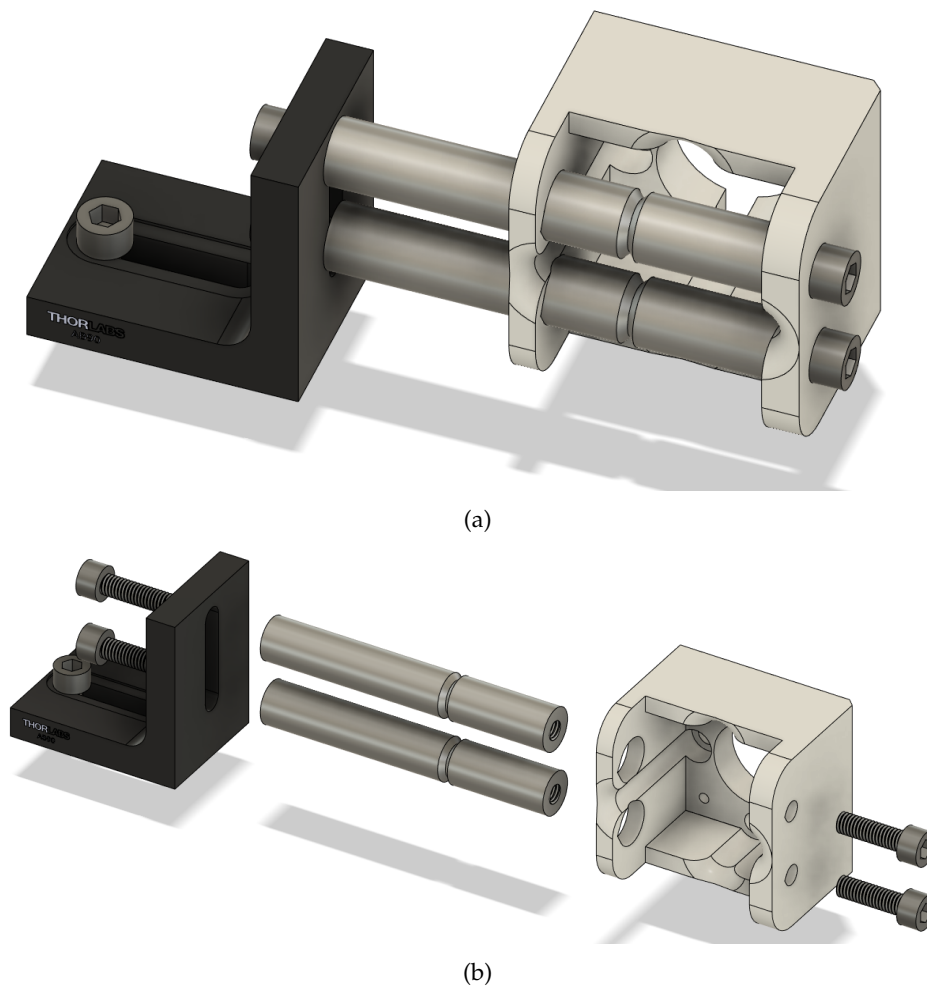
CAD drawings of the support arm holding the motor assembly to the L-bracket on the stage. (a) Standard and (b) exploded view.
